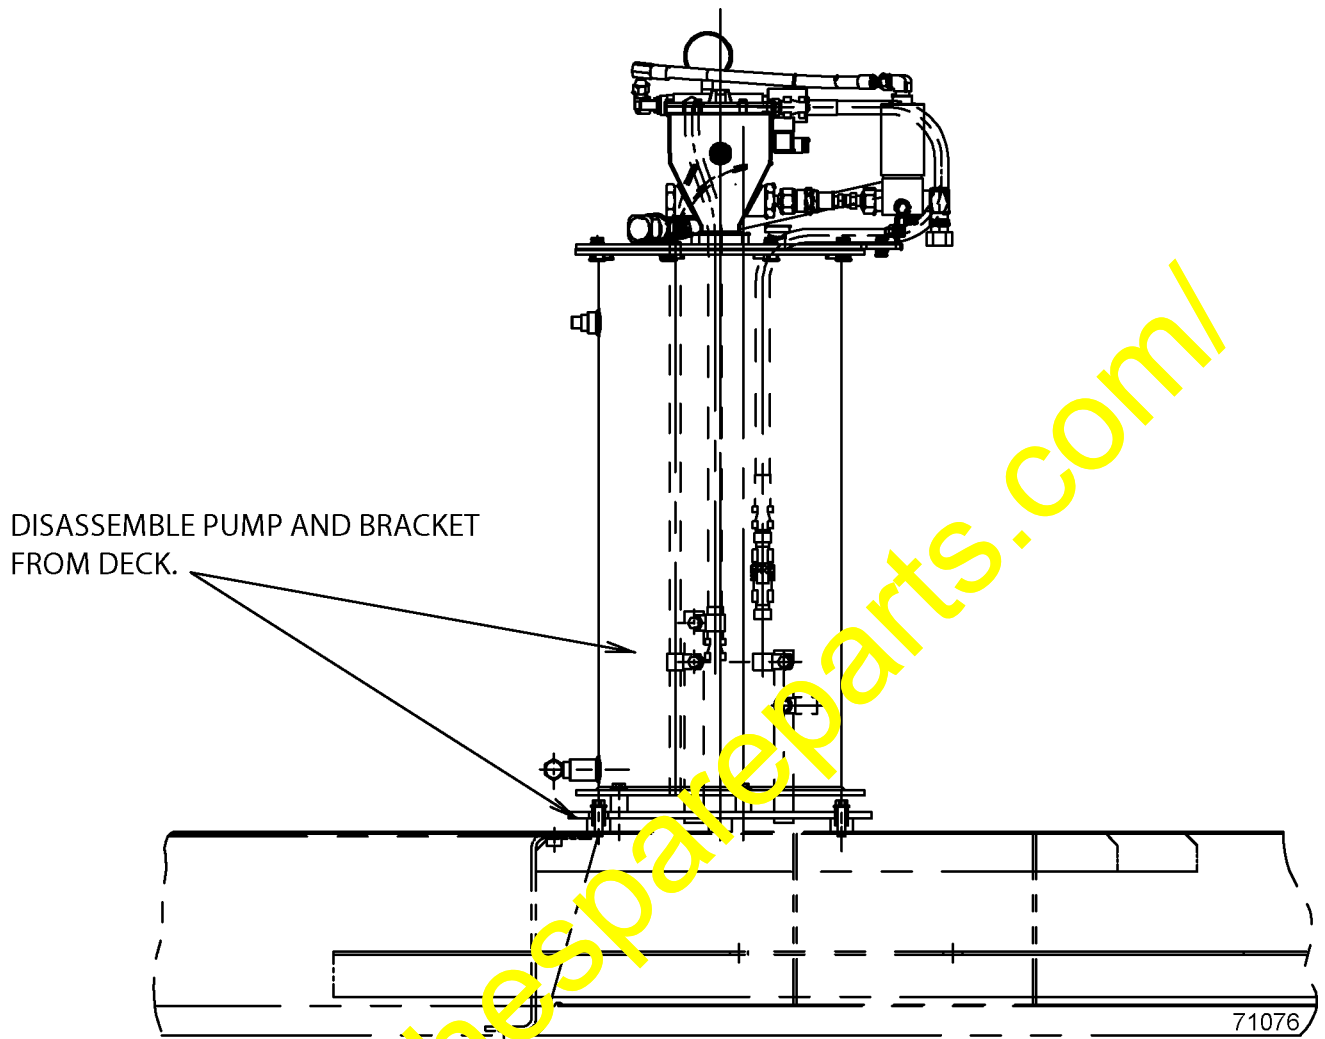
DISASSEMBLY OF LUBE PUMP
